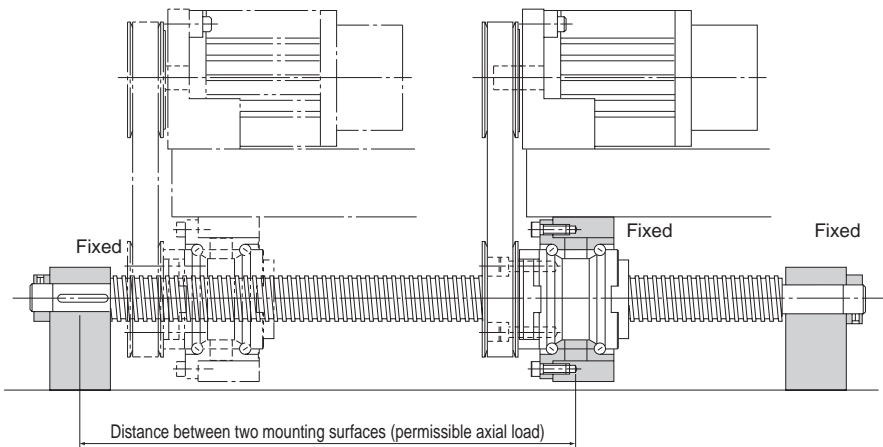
Screw Shaft Mounting Method for Rotary Nut Ball Screw: Fixed - Fixed
